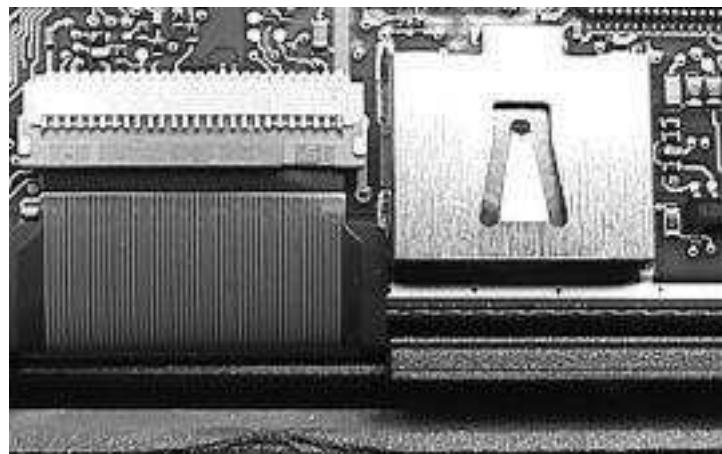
Correct way to assemble coaxial cable under hinge flex cover.
